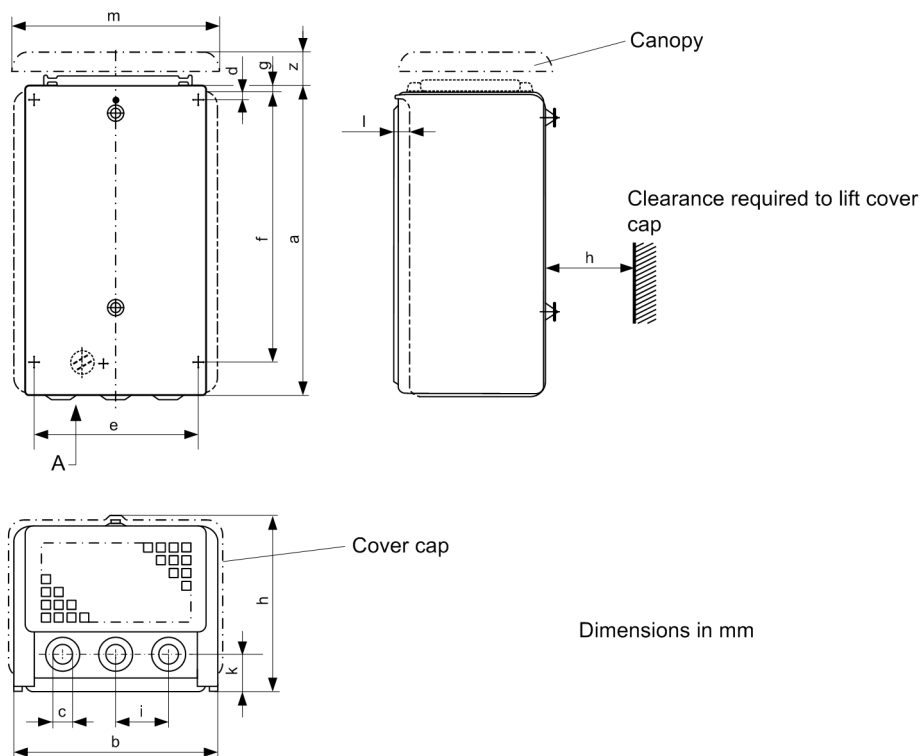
Dimensions of Coupling Unit 7XR6100-0BA0 for Panel Surface Mounting
